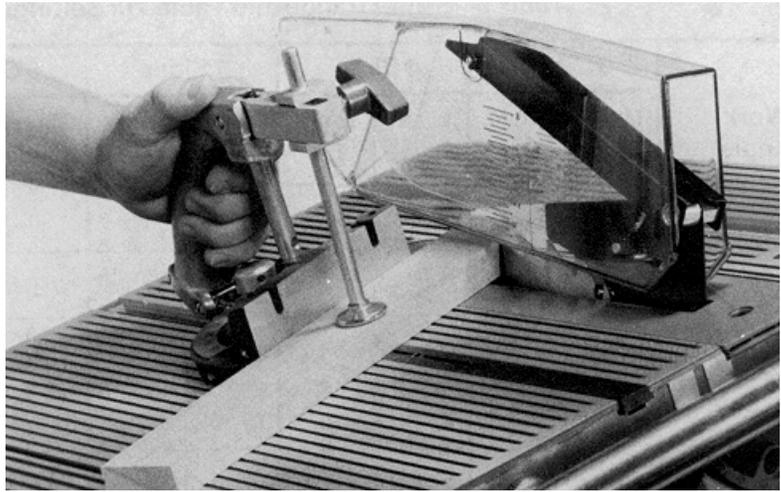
Hold the work firmly throughout the pass; cut slowly.
